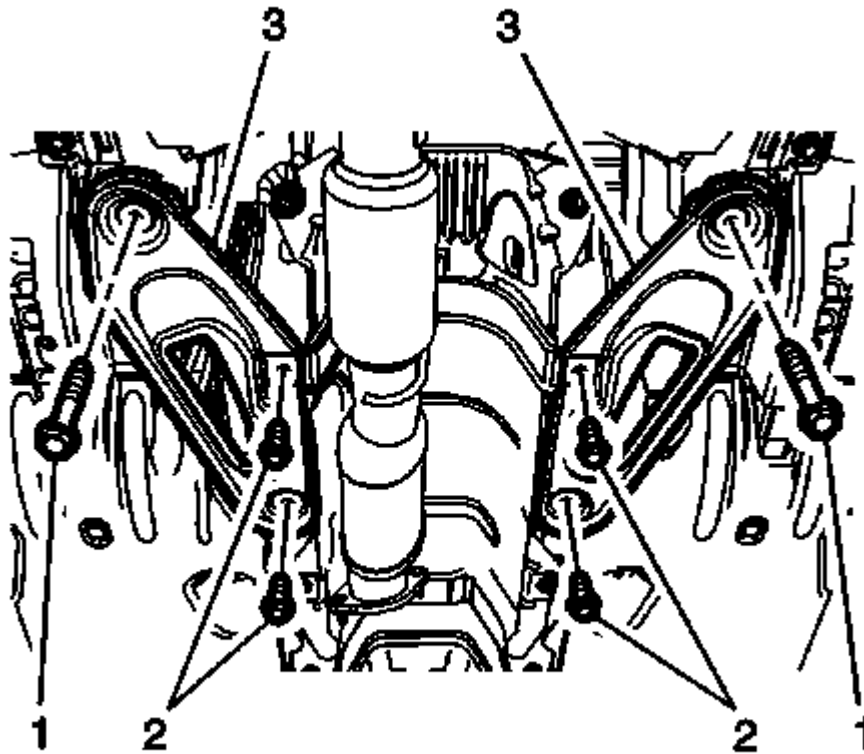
Left And Right Drivetrain And Front Suspension Frame Support
